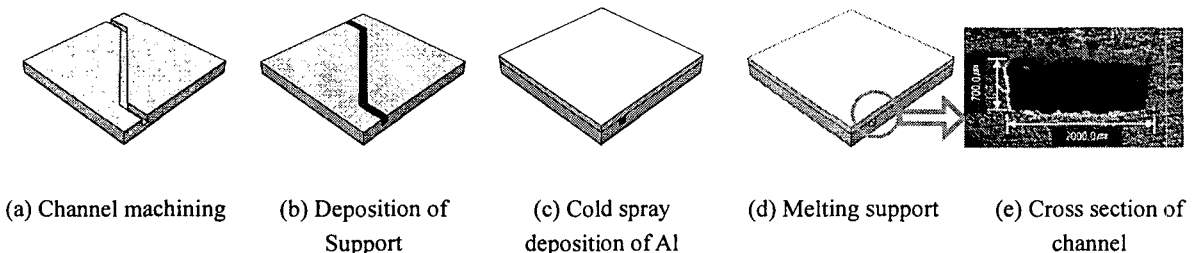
Process of making a cooling channel of mold by cold spray deposition and mechanical machining
